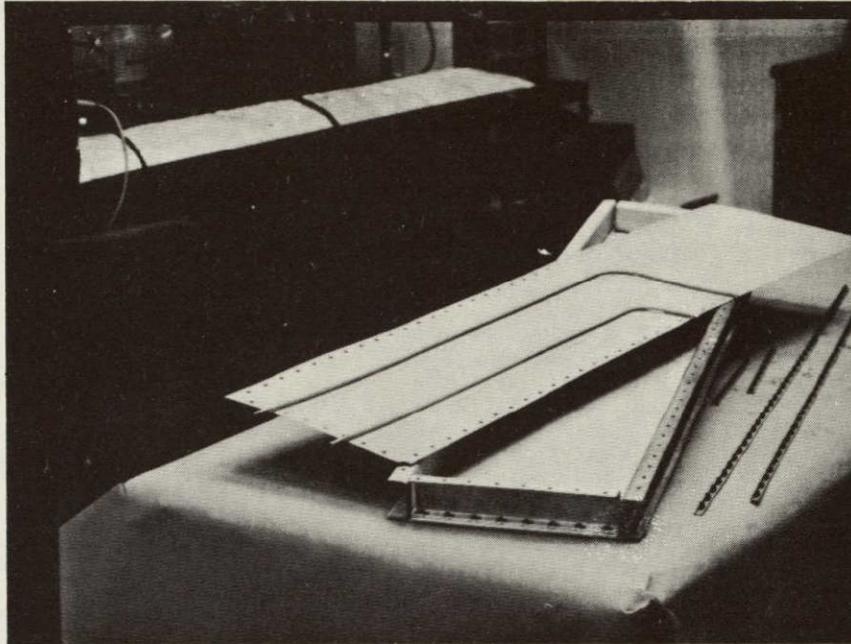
DISASSEMBLED PANEL FOLLOWING TEST
